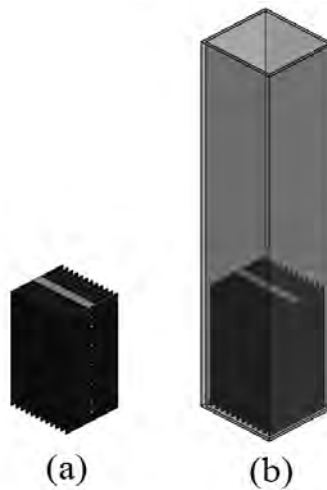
Unshielded heat sink (a) and shielded heat sink (b)
